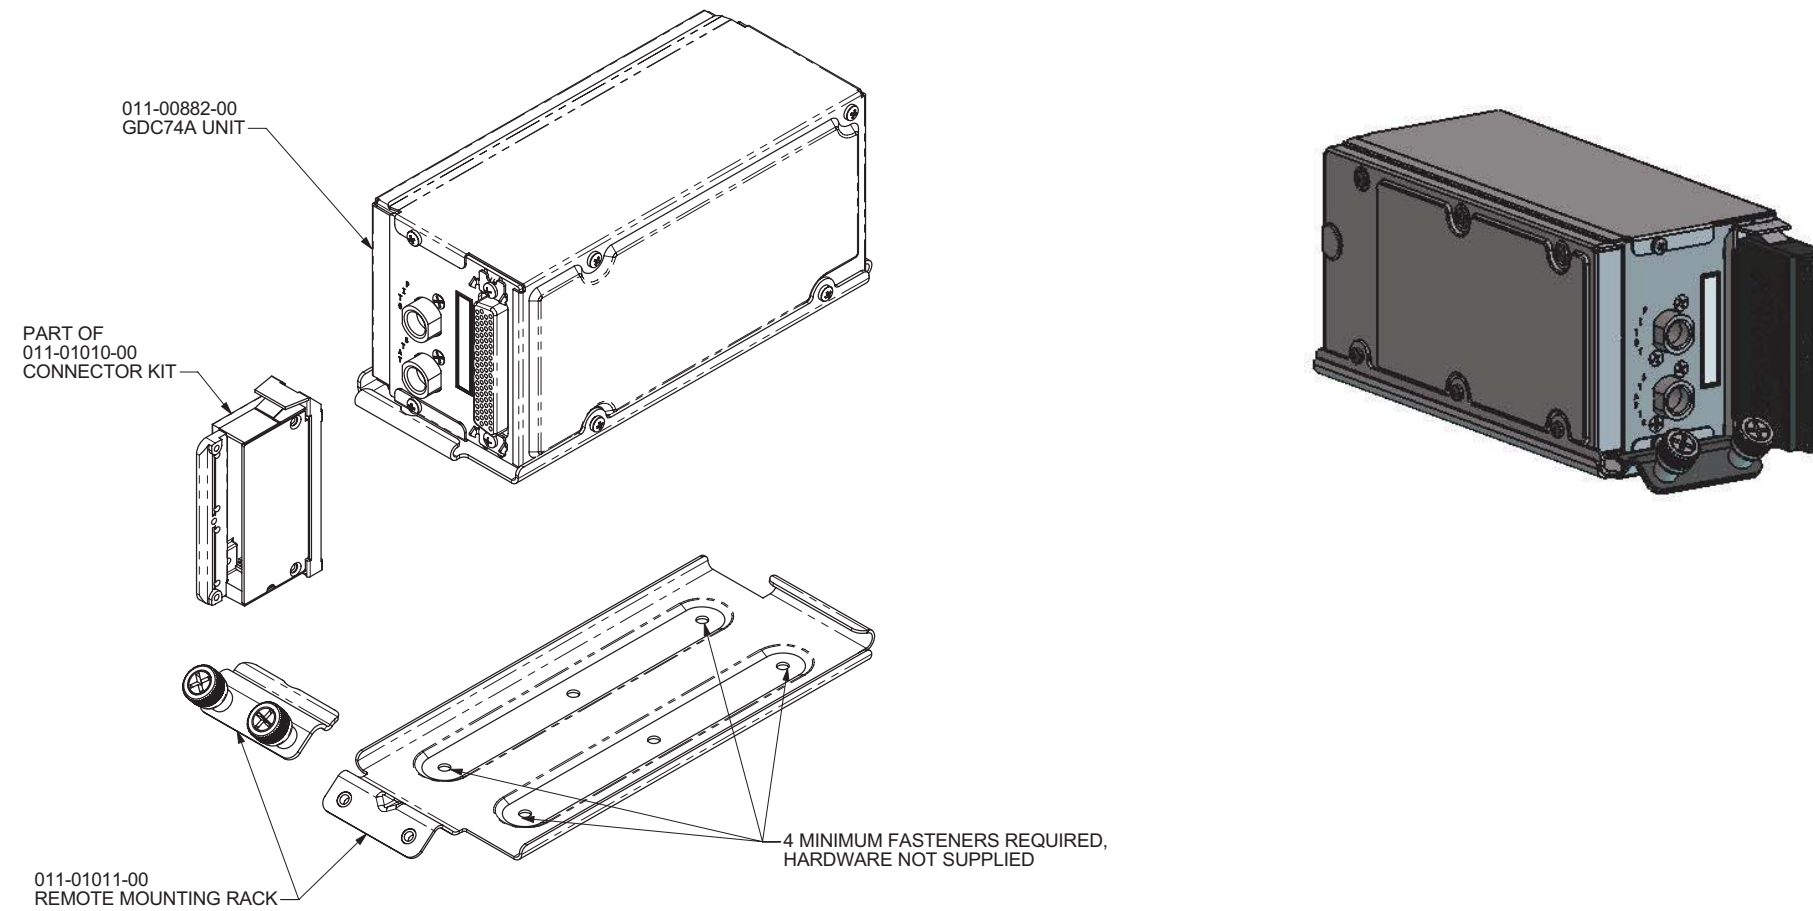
GDC 74A Outline Drawing for Remote Mounting Option II (Sheet 2)
